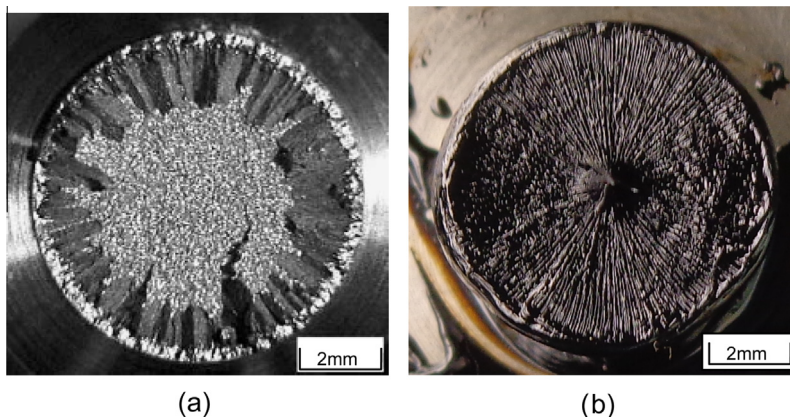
Fracture surface of cracked specimen: (a) 0.47 carbon steel in torsion fatigue of notched cylindrical specimens [34], and (b) AC + PE asphalt binder at 35 °C in torsion fatigue on DSR.
